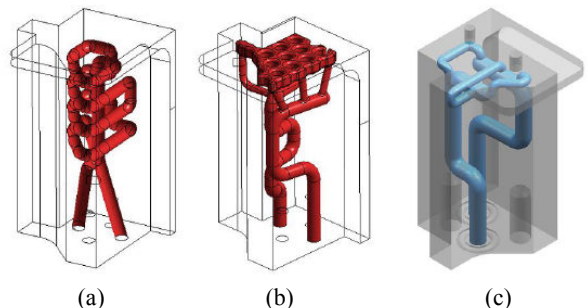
Various 3D shapes of conformal cooling channel for insert core block in injection mold
